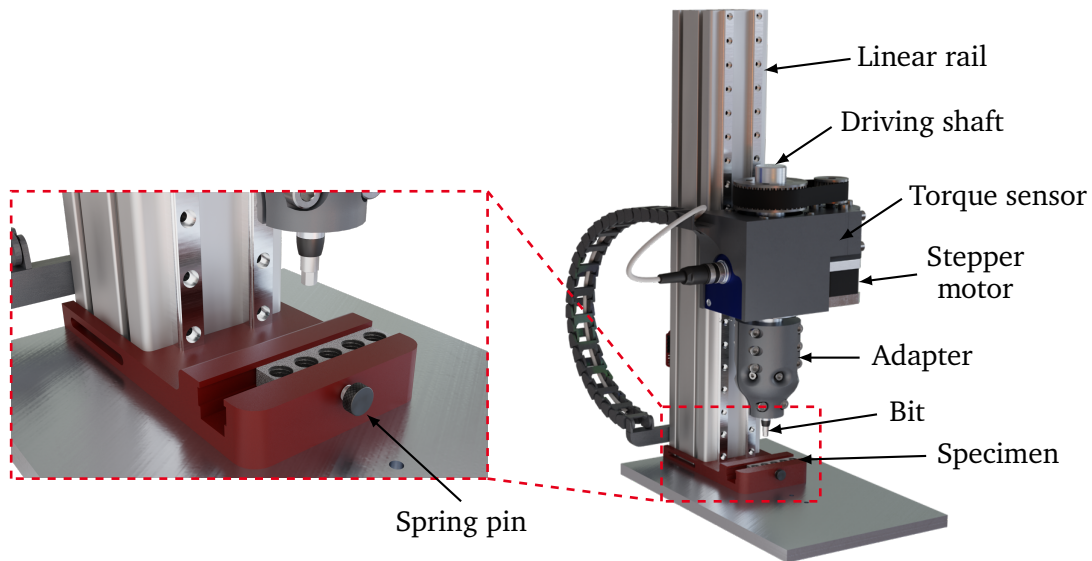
Test bench for determining torques that occur during fastening a screw into the LPBF-manufactured threads. The graphic is taken from [206].
